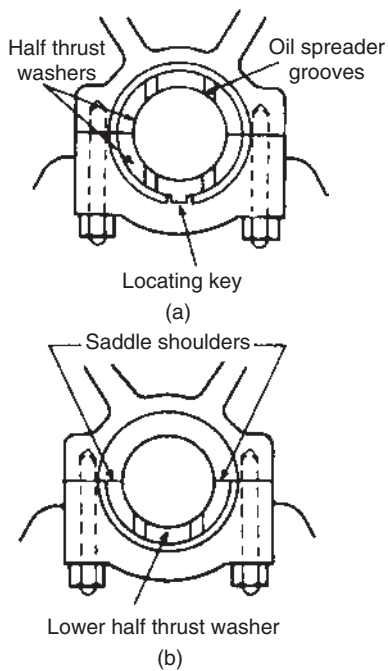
Crankshaft thrust bearings: (a) paired (b) single
